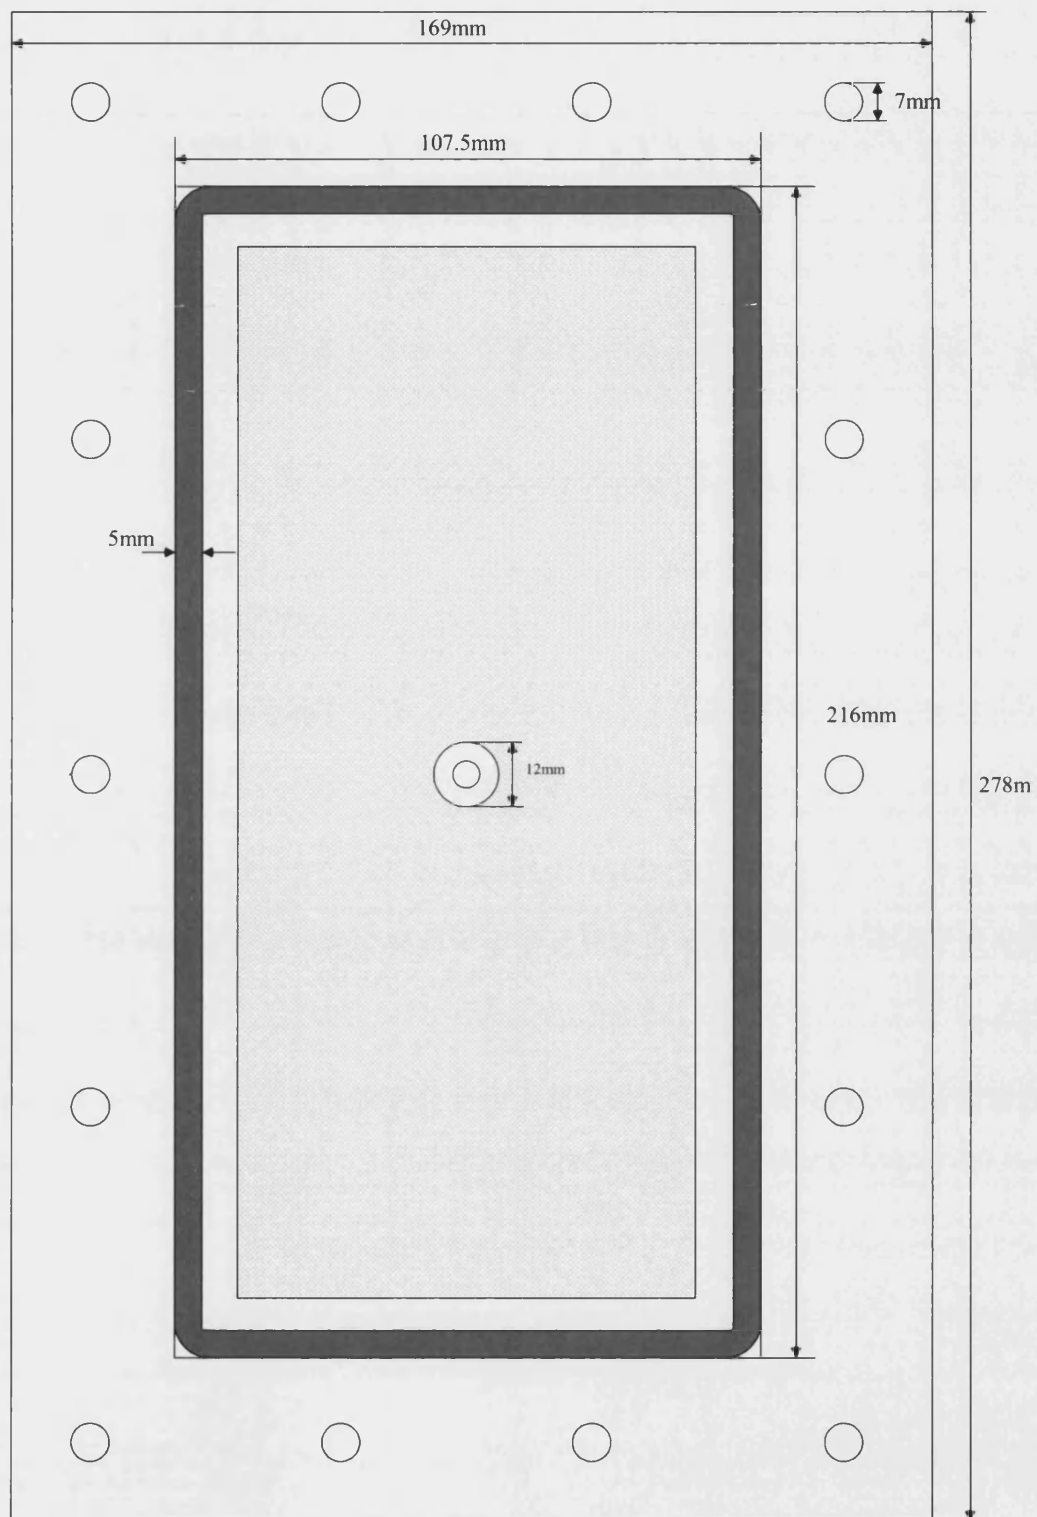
The graph of bottom stainless steel plate of single flatsheet module (shown at actual size)
